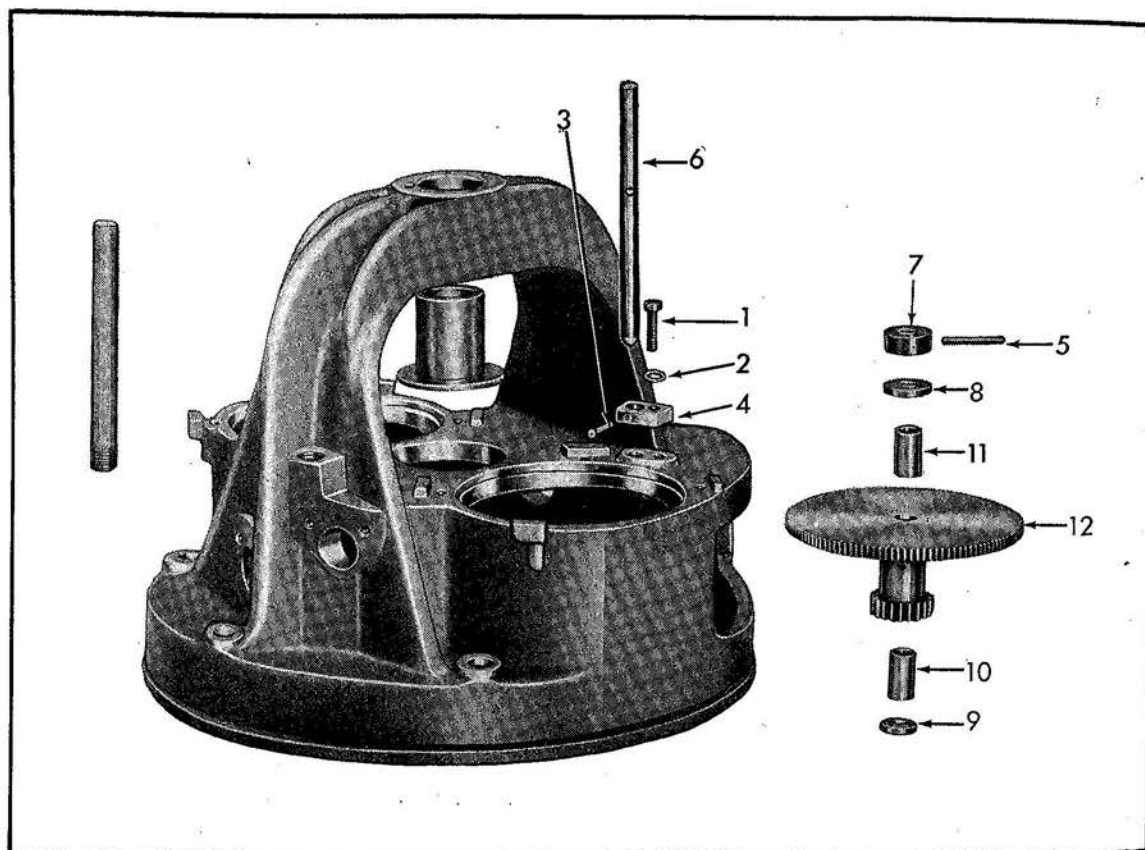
Sequence of Disassembly of Cluster Gear from Chassis
